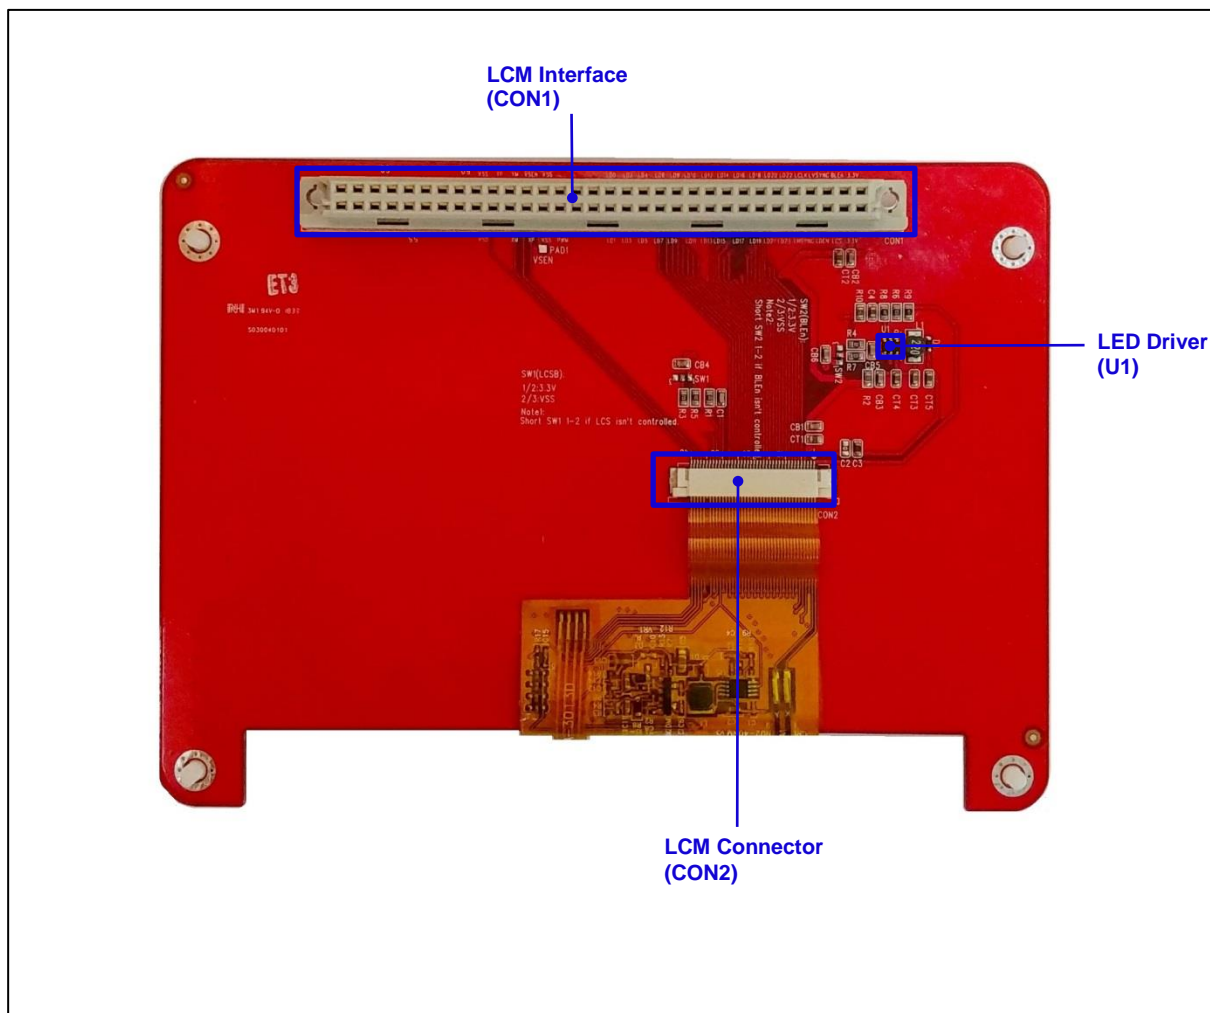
NuDesign TFT-LCD5 PCB Board (Back)
